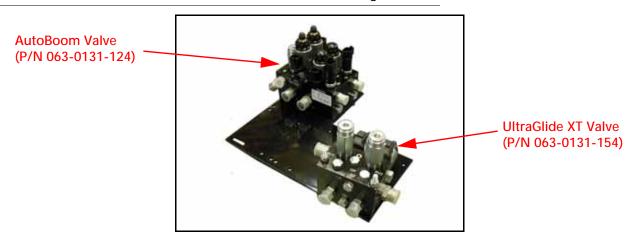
AutoBoom Valve Installed on Valve Mounting Bracket
